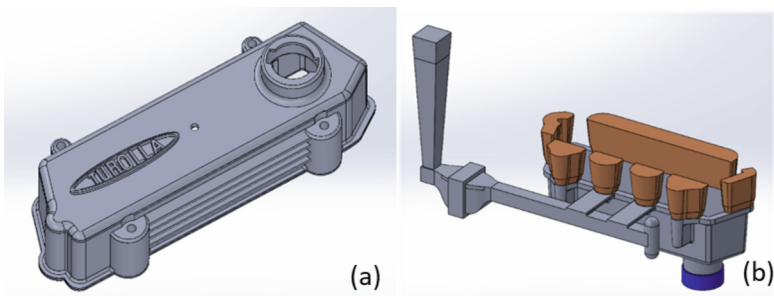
Output of the computer-based design phase: (a) the machined model of the valve cover; (b) the casting equipment.
